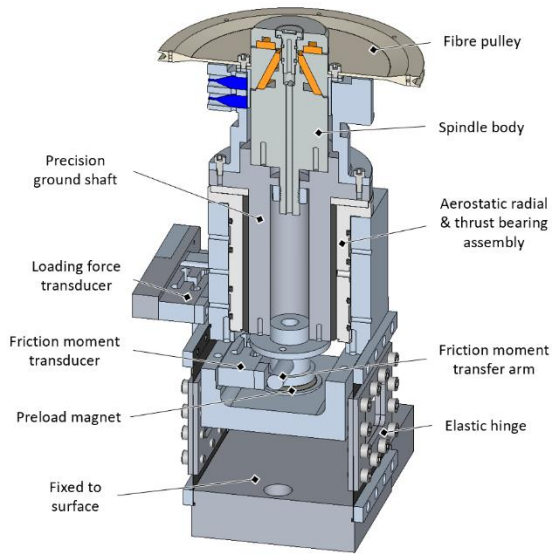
Cutaway view of the friction moment measurement device. The investigated spindle rests on top of a linear flexure guide and a rotational gas bearing.
